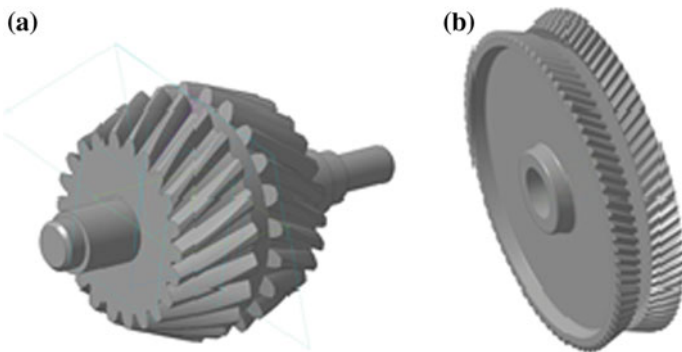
a 3D model gear of CGCh; b 3D model gear of CGA
